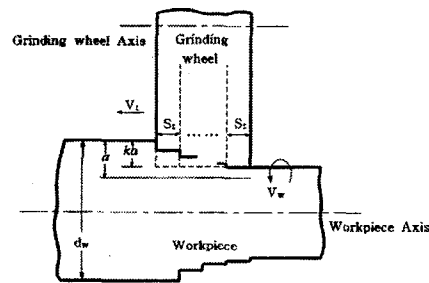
External cylindrical traverse grinding showing exaggerated wheel surface due to machining elasticity
